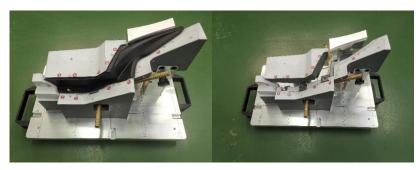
Checking Fixture for Seal, FR Fender to Cowl Side, RH/LH
